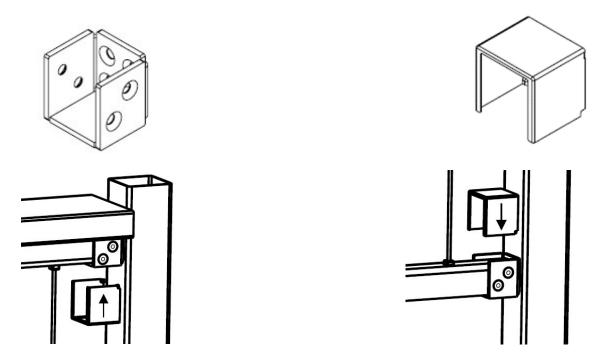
UNIVERSAL RAIL BRACKET AND ASSEMBLY
